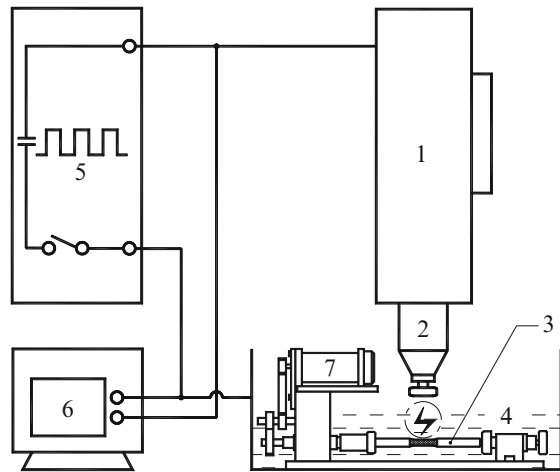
Schematic drawing of rotary EDM (1 servo-control; 2 electrode; 3 workpiece; 4 dielectric fluid; 5 pulsed generator; 6 oscilloscope; 7 DC motor) [9], reprinted with permission
